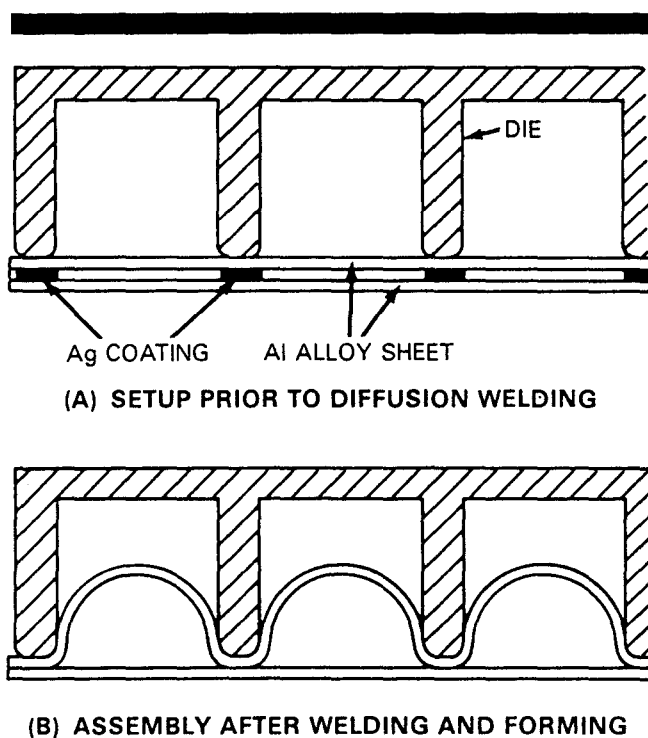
Fabrication of Diffusion Welded Aluminum Assembly Using Silver as a Filler Metal
